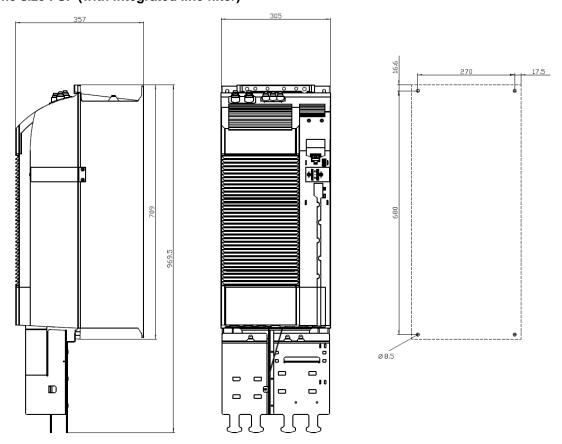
Dimension drawing, PM240-2 Power Module, frame size FSF (with integrated line filter); all dimensions in mm and (inches)
